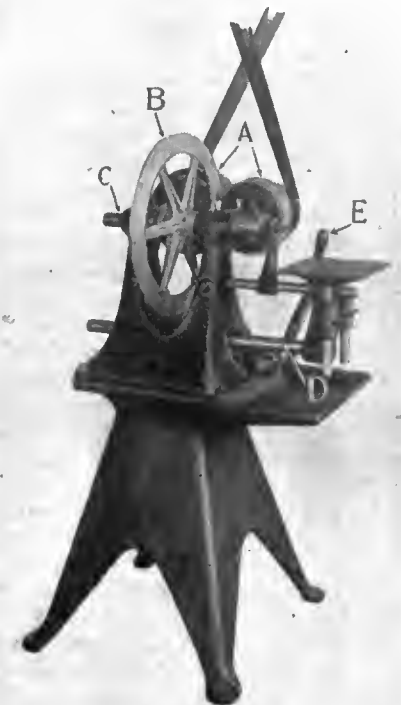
RICKERT-SHAFER FRICTION TAPPING MACHINE.
